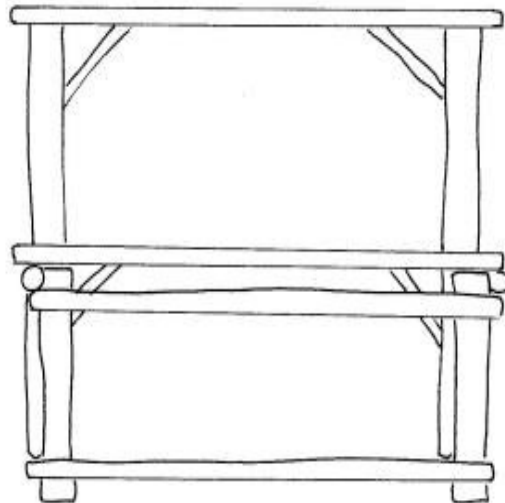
Front View with diagonal braces attached – note; bottom shelf not shown.
